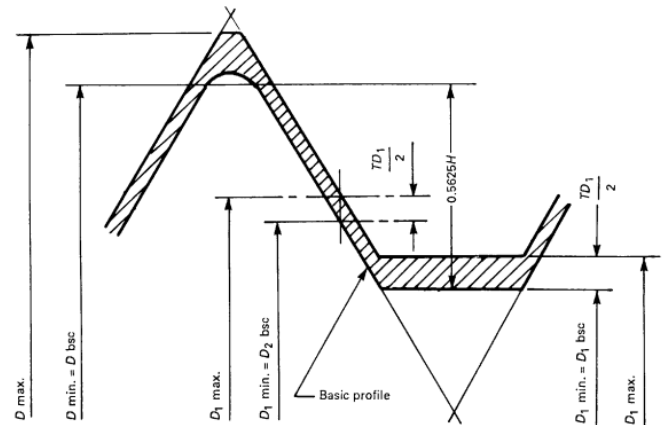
Internal UNJ Thread design and tolerances [14]
